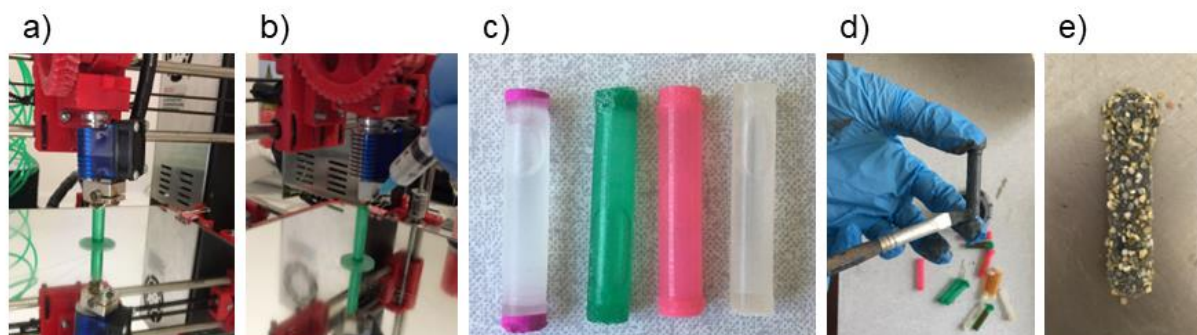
Model 1 capsules: a) printing of the first capsule end sealing and its shell; b) print is interrupted, capsule is filled and then print is resumed in order to realize the end sealing; c) 3D printed capsules, filled and with both ends sealed (from left to right PMMA, PET, PLA, PETG); d) coating application and e) capsule are rolled in the sand in order to improve their bonding with the cementitious matrix.
